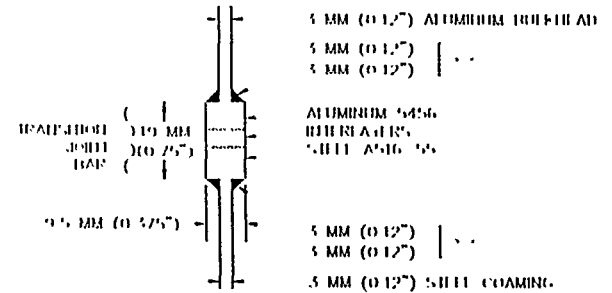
Design of welds between aluminum and steel plates using transition joint material.
